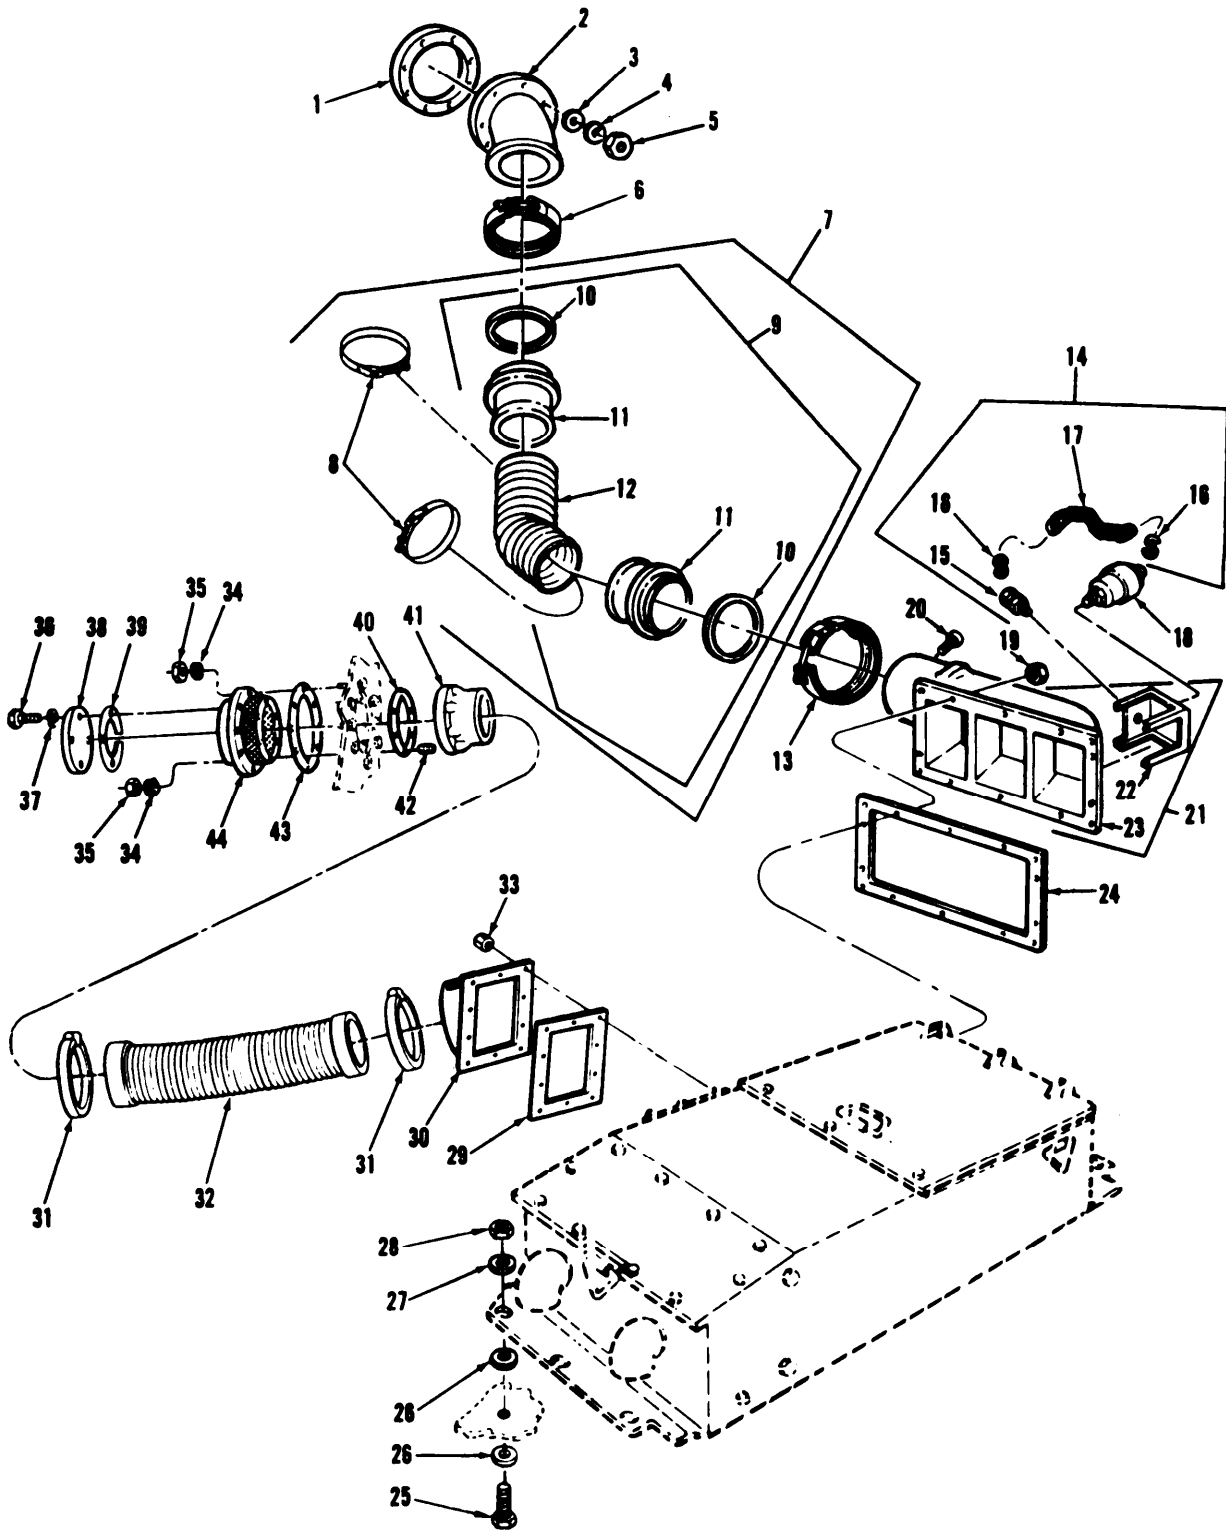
AIR CLEANER HOSE ASSEMBLIES AND RELATED PARTS (2CA AND 2DA ENGINES).
